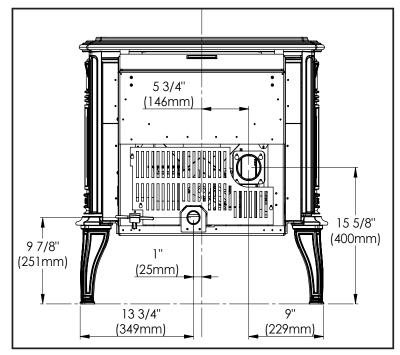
Meridian Cast Iron Inlet and Outlet Location.
